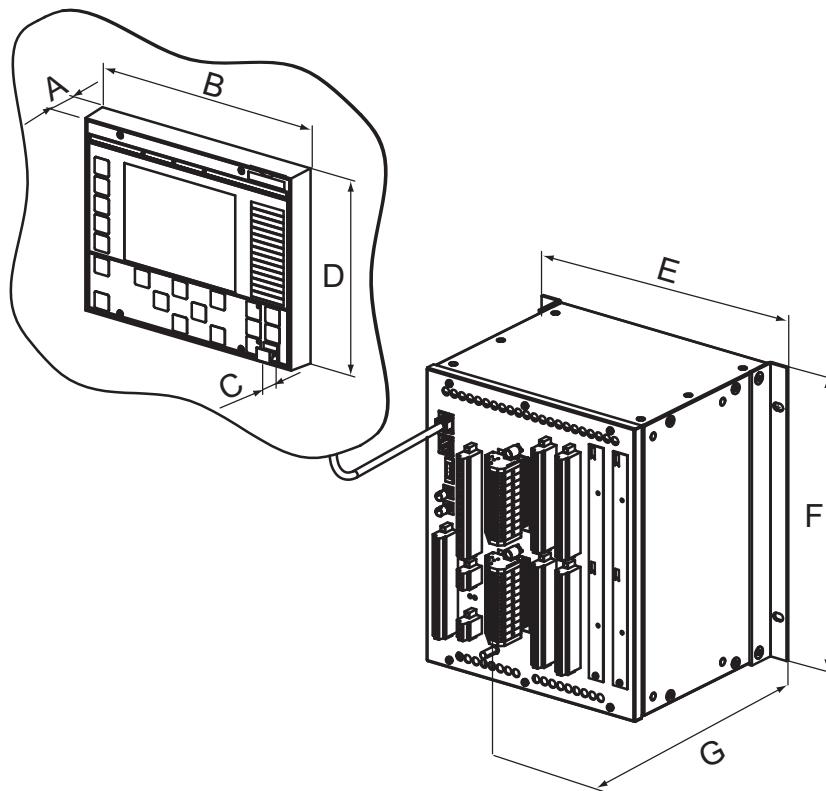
External LHM display wall mounted and connected to the 6U main unit
